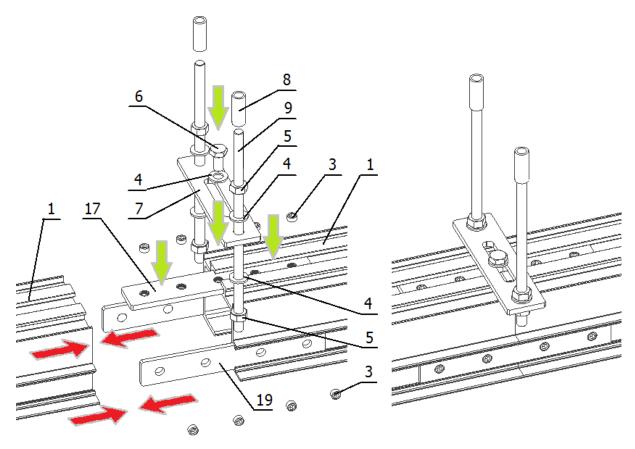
Scheme of track connection for a 2-point suspension by means of a straight connecting plate and a side plate (example for track 34-0151): red arrows - inserting the plate into the track sections; green arrows - twisting of the components of the track fastening
